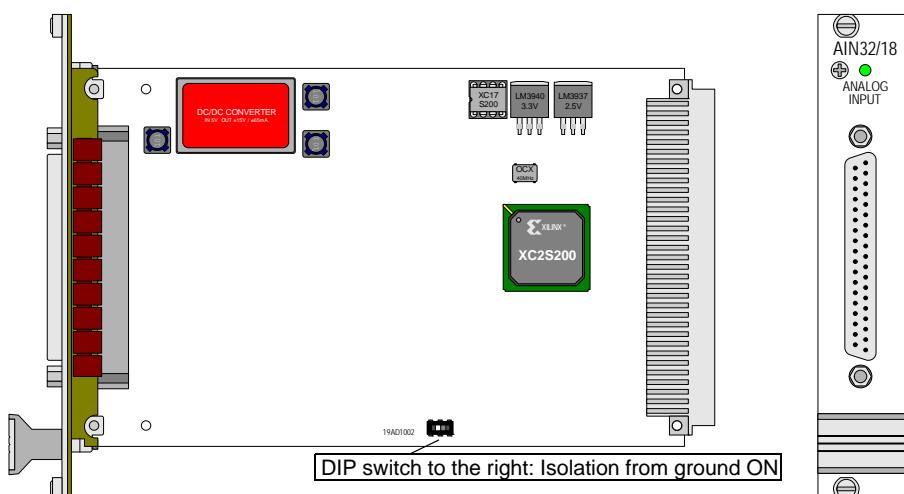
Pro II-AIn-32/18-D Rev. E: Board and front panel
